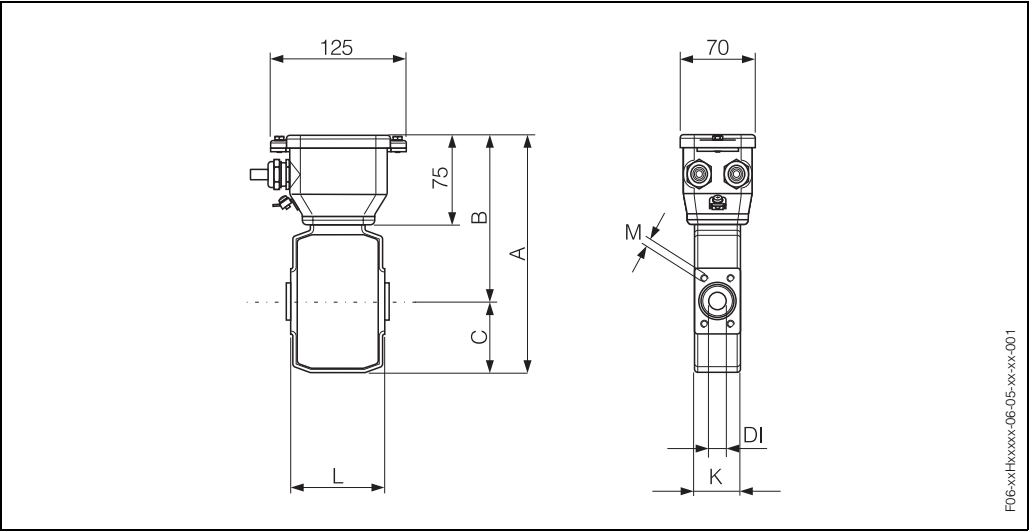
Dimensions Promag H / DN 2...25 (remote version)
